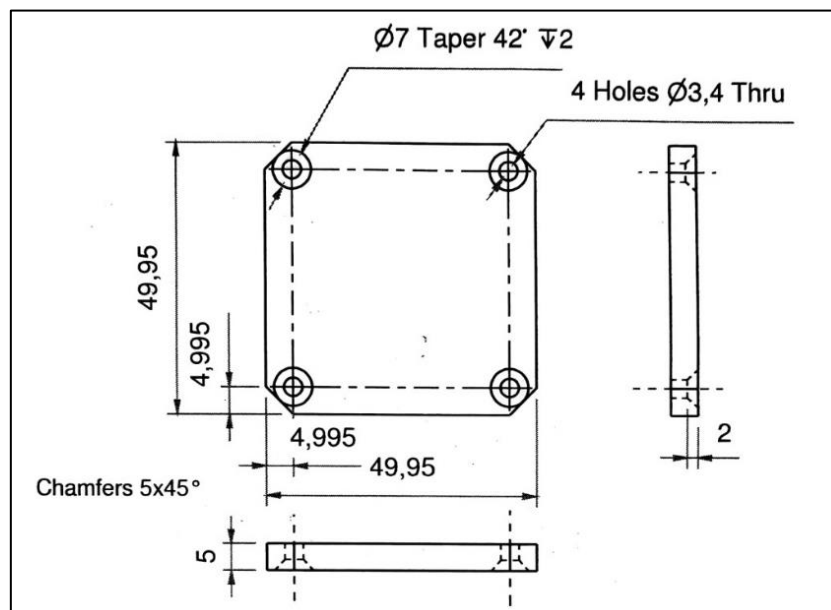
TECHNICAL DRAWINGS OF BASEPLATES FOR USE IN EOSINT M 280 REDUCTION CHAMBER.
